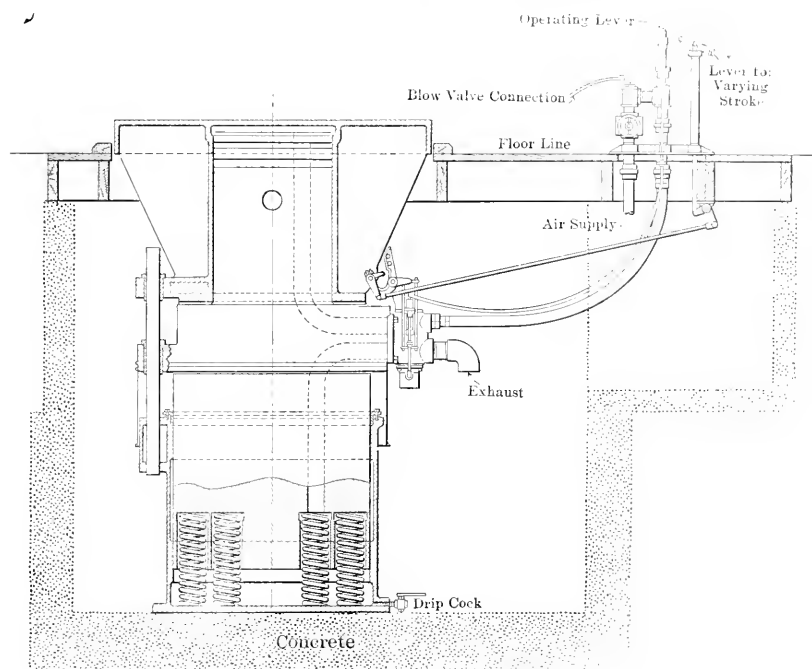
SECTION OF MACHINE TO HANDLE MOLDS WEIGHING 25 TONS
